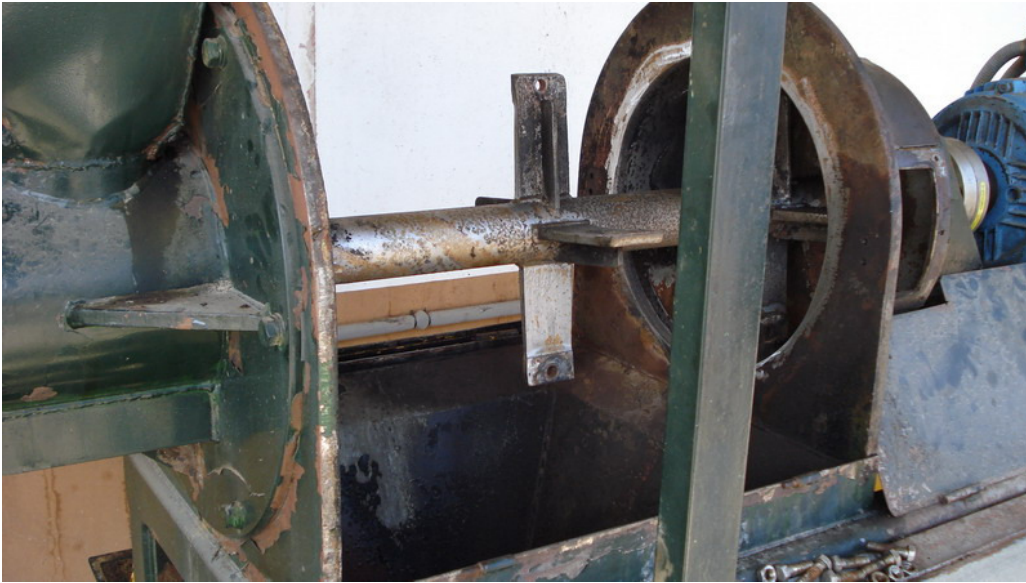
Machine to separate the olive kernels from pulp and skin [6]
